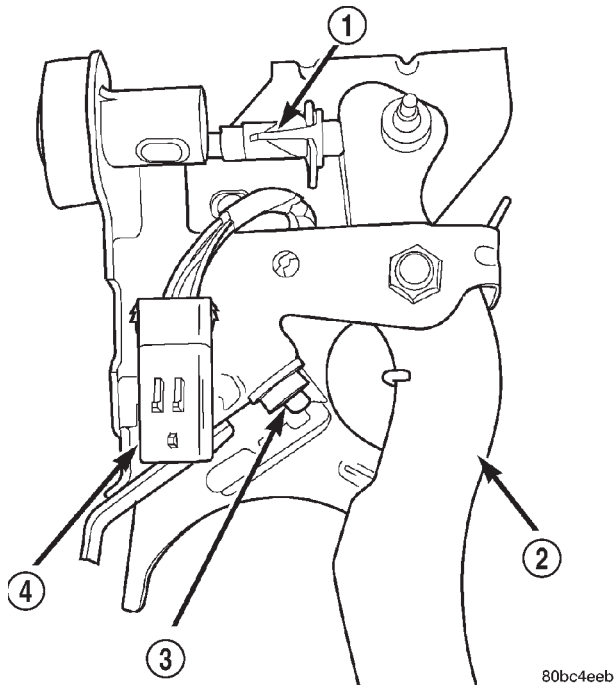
Clutch/Brake Pedal Bracket Assembly
